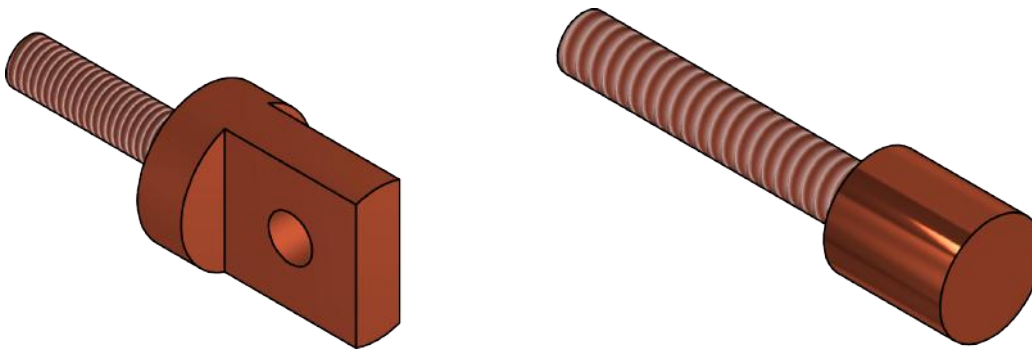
(Left): The end of the cold finger which connects to the thermal feedthrough (Right): The end of the cold finger which is inserted into the cryostage
